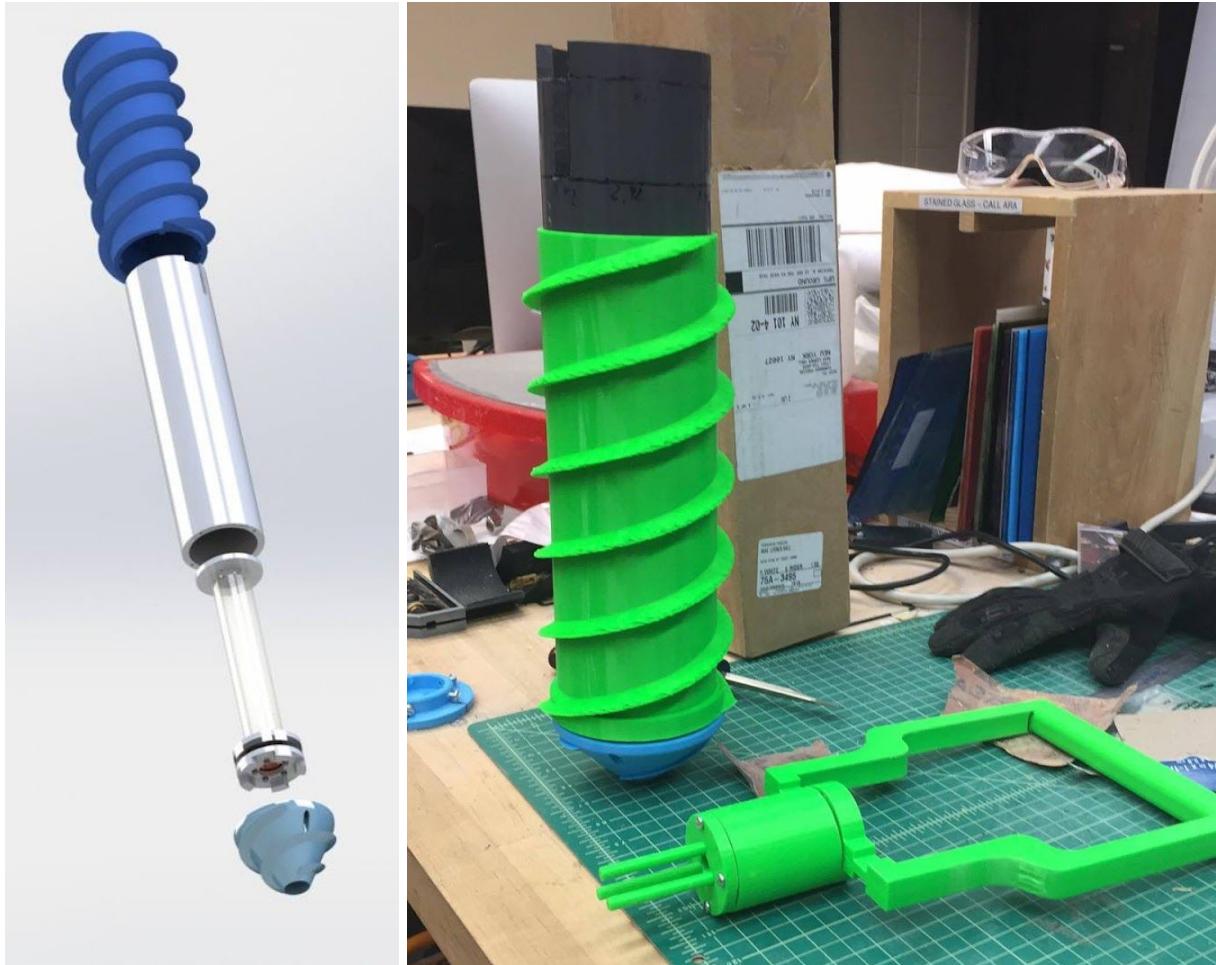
Iteration III of the Lion Drill: exploded view of regolith assembly, manufactured regolith assembly
